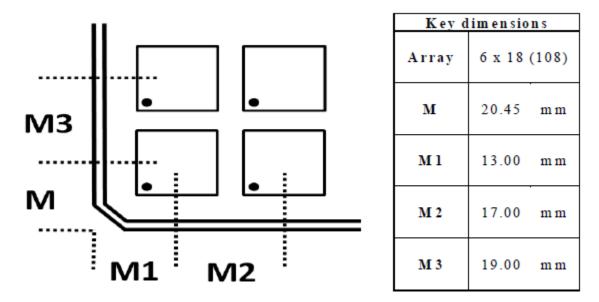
Matrix-tray key attributes and dimensions (for LPDDR5 package)
